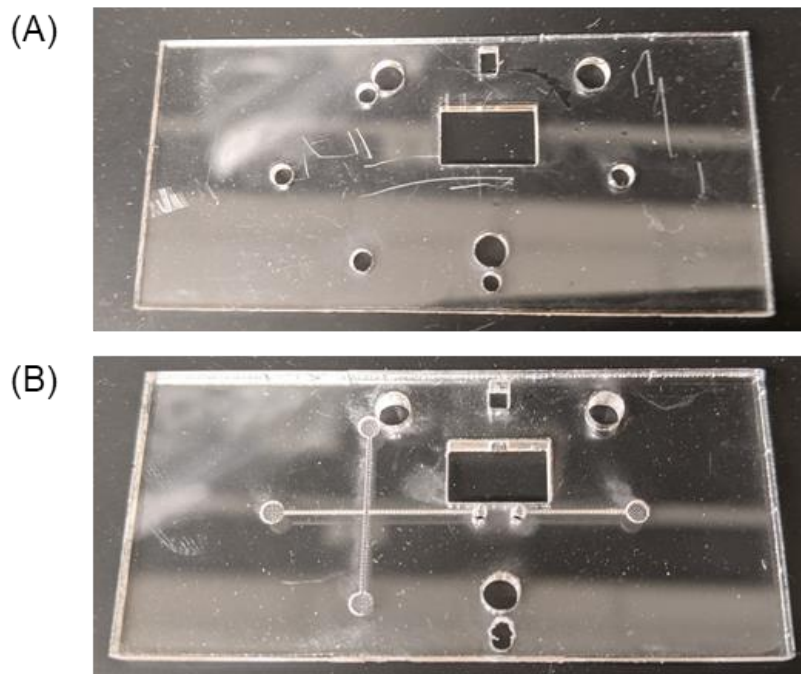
(A) Example of pieces of a thermoplastic device, top layer. (B) Bottom layer of thermoplastic microchip device. Contains access to microring chip surface and gasket layer. These devices were fabricated by CO₂ laser etching a polymethyl methacrylate sheet. Pieces are thermally annealed to form a whole device, complete with screw holes to secure the device.
